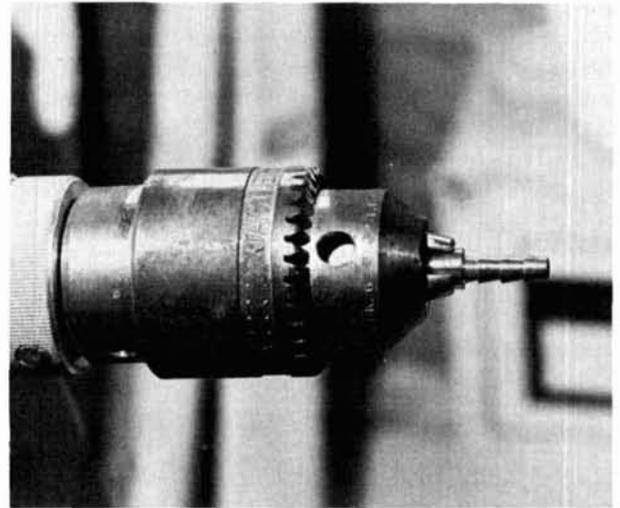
The Barb fitting after one end has been machined. The ribbed end is about to be machined.
